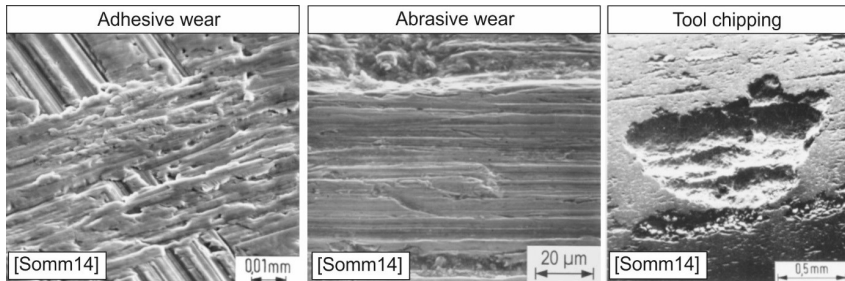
Tool wear mechanisms for abrasive and adhesive too wear and tool chipping [Somm14]
